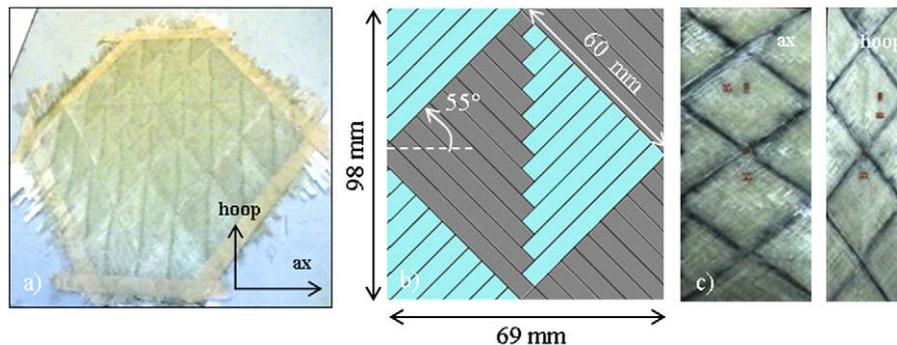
FWC flat specimen (a) pre-form with filament winding pattern, (b) unit cell dimensions, (c) specimens in hoop and axial direction of the pattern.
